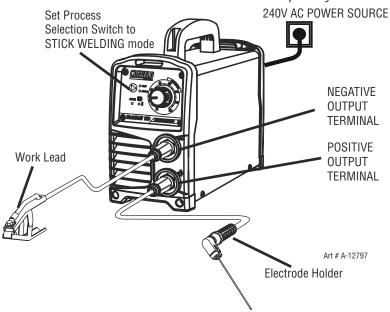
Setup For STICK (MMAW) Welding
